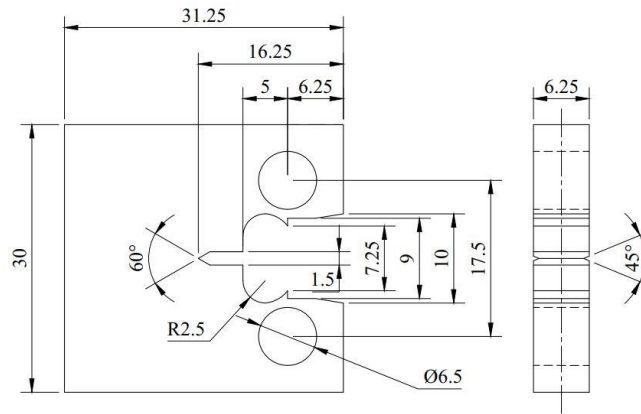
Geometry of CT specimen used for Fracture Testing.
